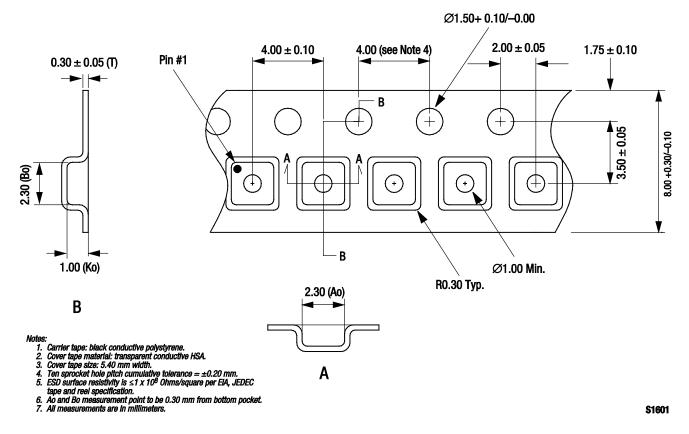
SKY67023-396LF Tape and Reel Dimensions
